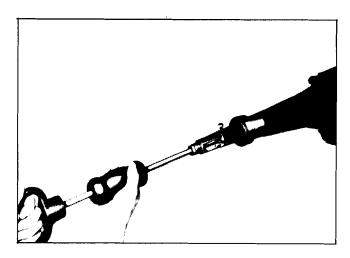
B-5 Removing Extension Housing Oil Seal and Bushing
